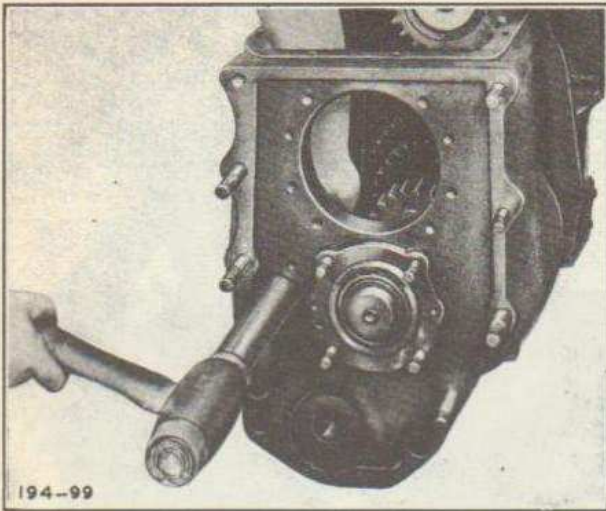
Installing Reverse Idler Shaft and Gear Assembly
